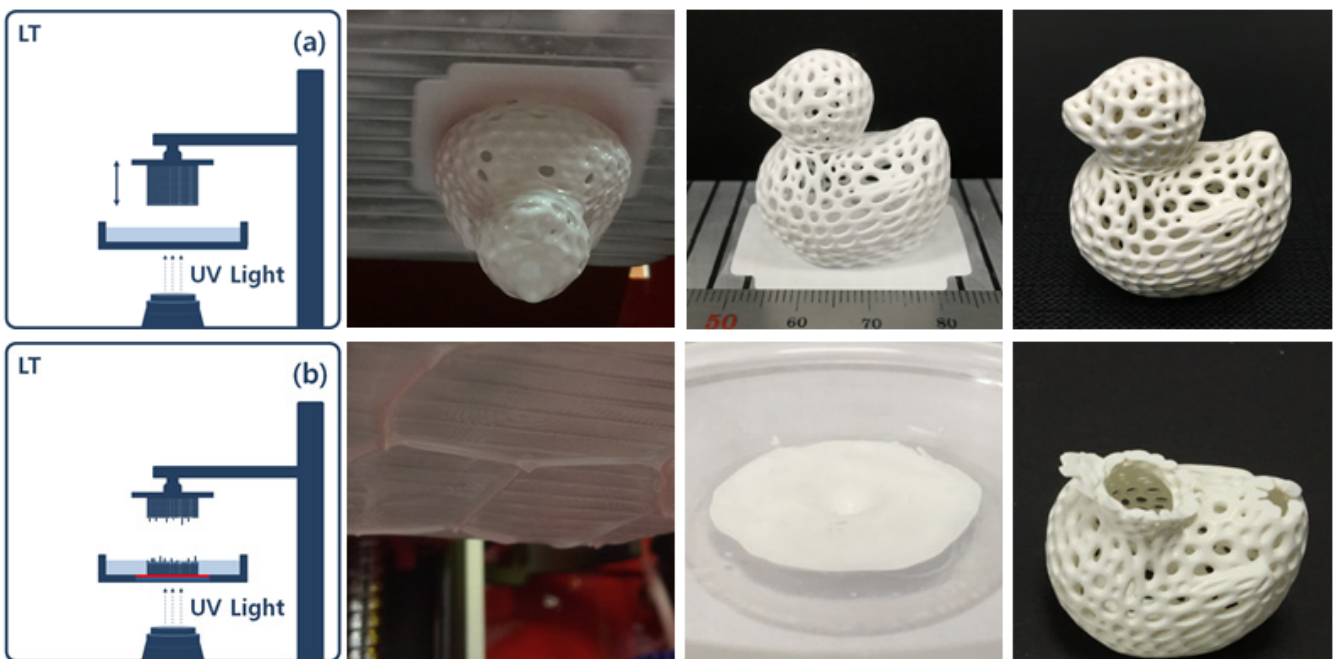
The specimens of alumina printing using lifting mechanism of build platform: (a) success, (b) failure.
